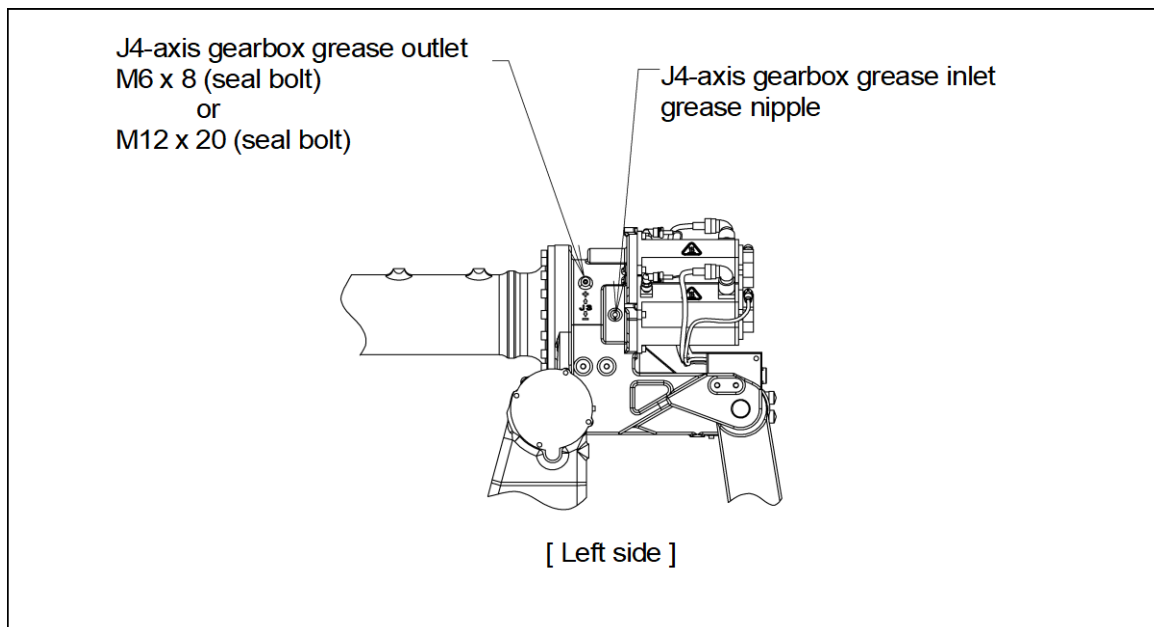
(c) Replacing grease of J4-axis gearbox
